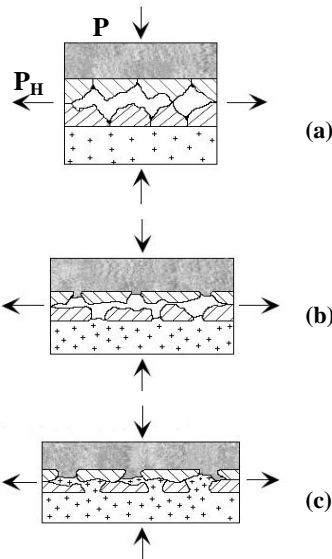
Bonding mechanism in cold pressure welding:
